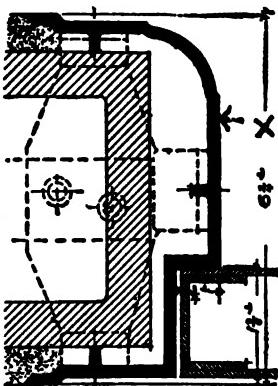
Wrought-Iron Welded Door-Frame.
